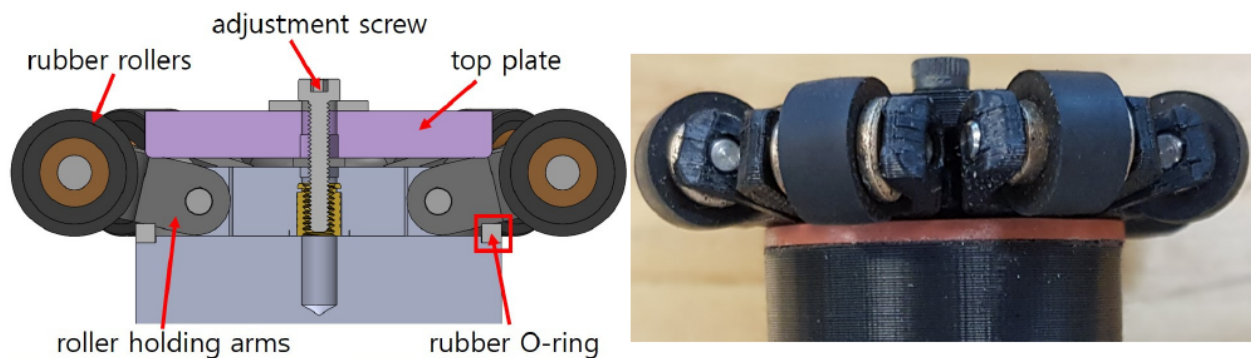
CAD design (left) and prototype (right) of the variable diameter friction drive
